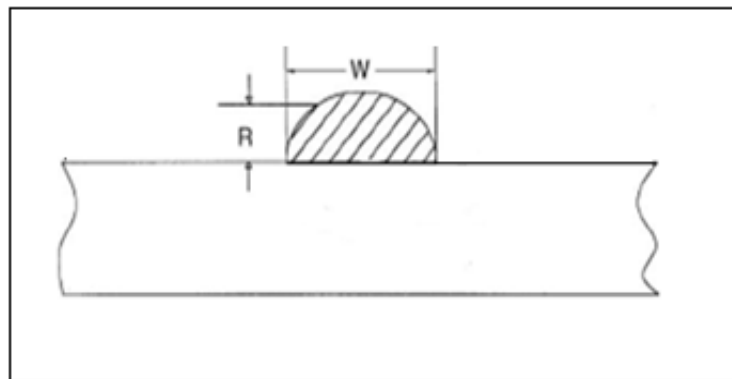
Cross-Sectional of weld bead, where  $W$  be weld width in mm,  $R$  be the Reinforcement in mm.
